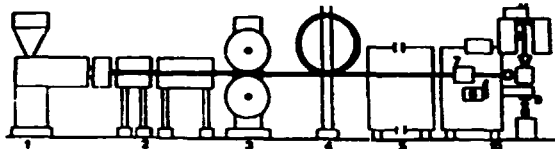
Extrusion stretch blow mold. Diagrammatic representation of the Hercules/Bekum OPP bottle line: (1) Extruder; (2) Sizing baths; (3) Haul-off; (4) Loop stand; (5) Reheat oven; (6) Cutter, (7) Puller, (8) Mold closing unit neck calibration; (9) Clamping system; (10) Stretch blow molding machine.
